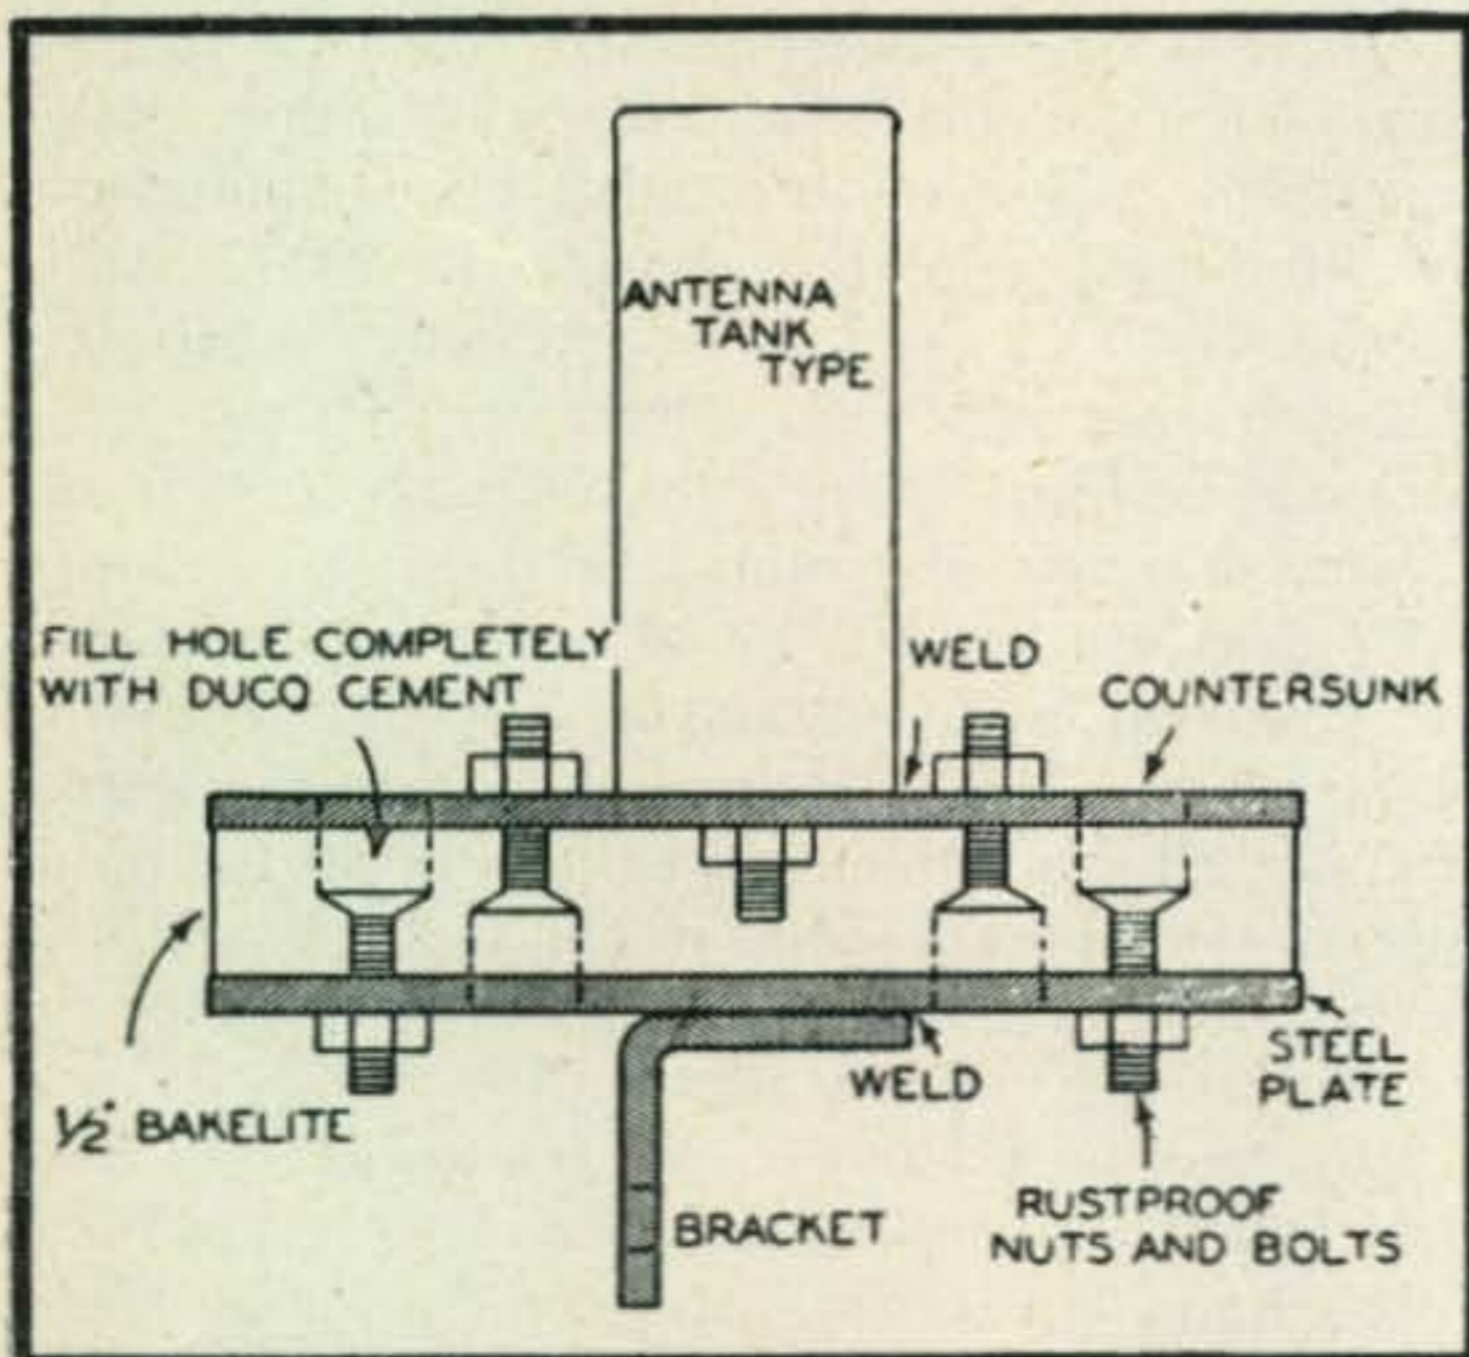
Exaggerated assembly view of the insulated angle base for mounting the tank type antenna on the bumper of any automobile.
